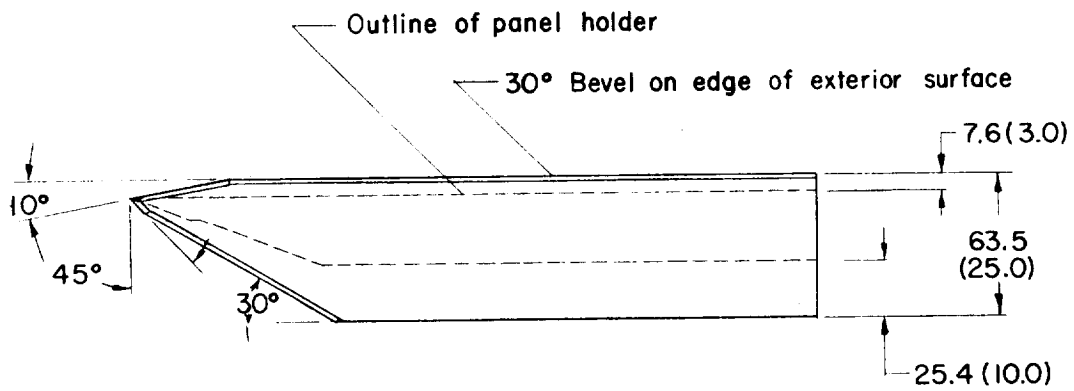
Details of panel holder. All dimensions are in cm (in.).
